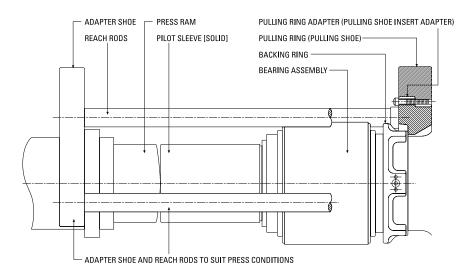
Fixture for removing a bearing with a bearing press or wheel press.
